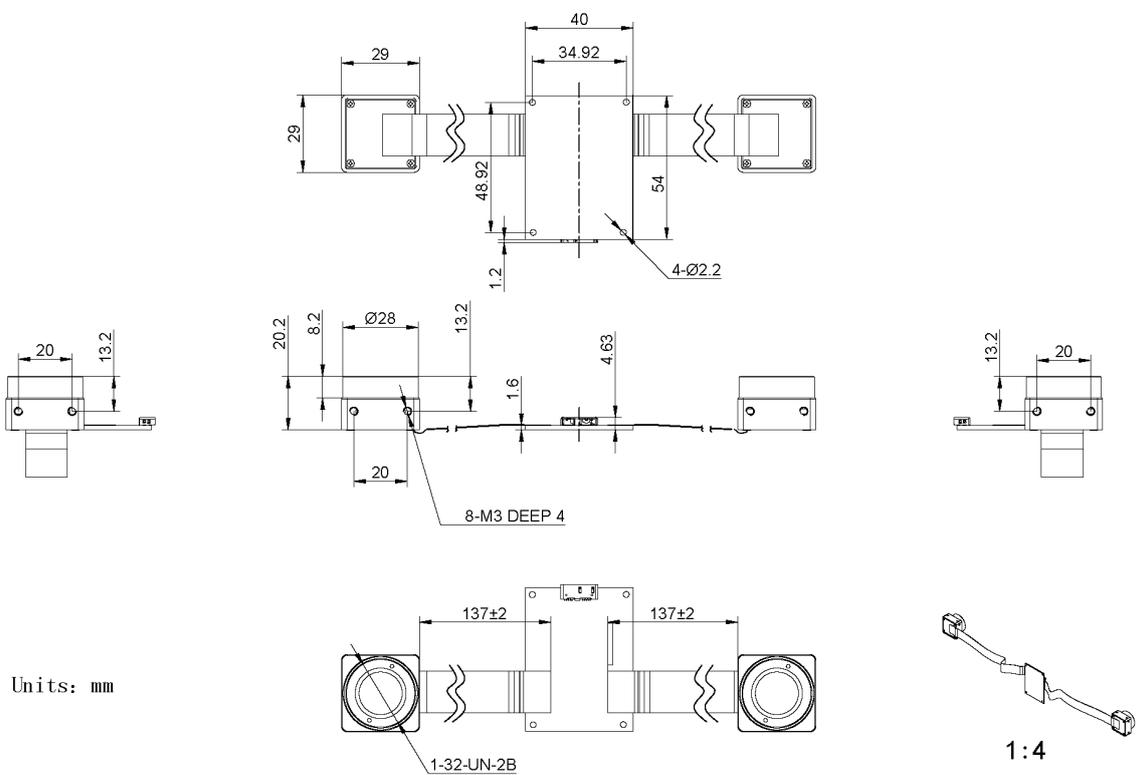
Split USB3.0 binocular camera mechanical dimensions (C-Mount)
